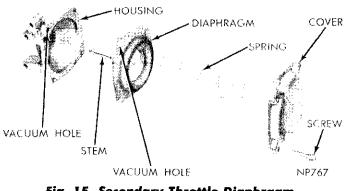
Secondary Throttle Diaphragm (Exploded View)
